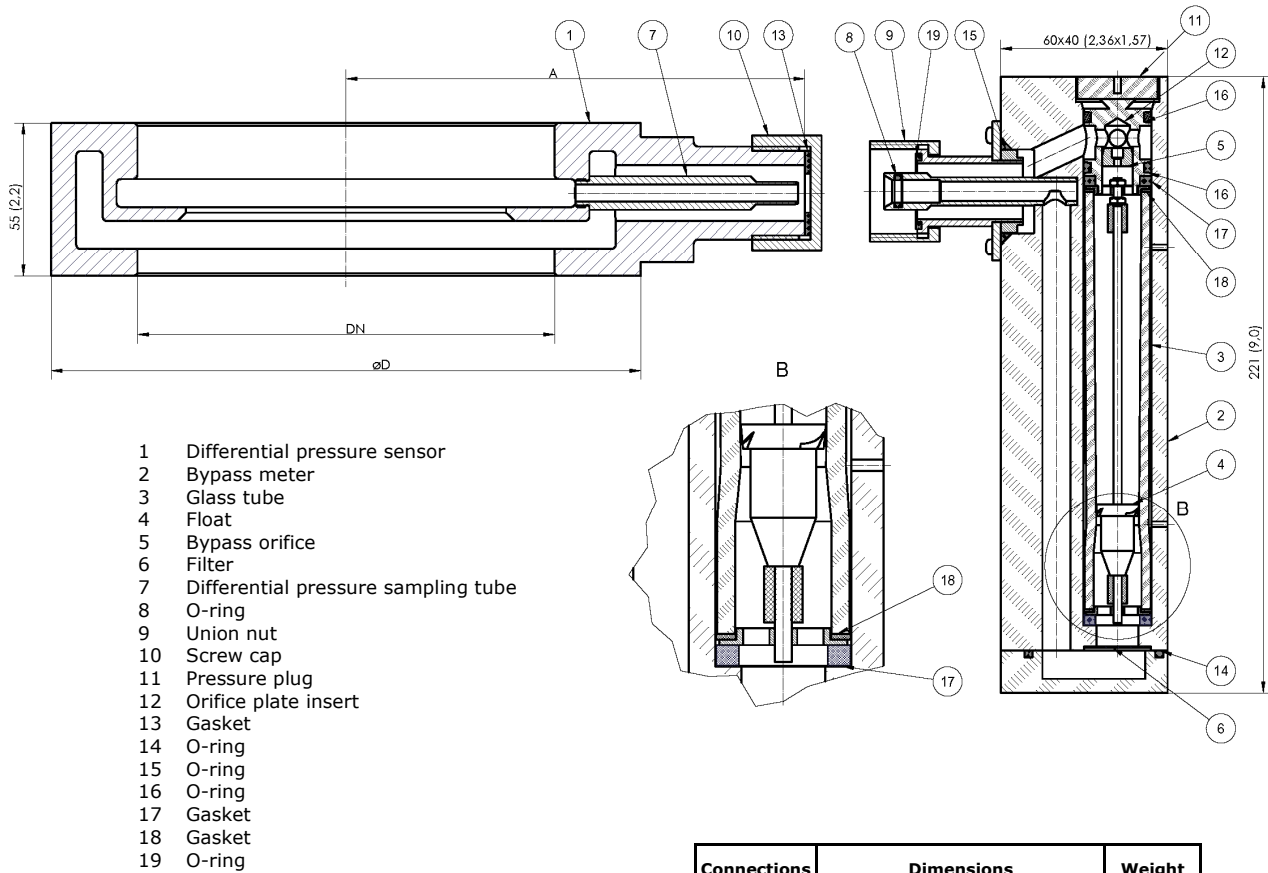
Turbo-Lux, components and dimensions in mm (inch)
